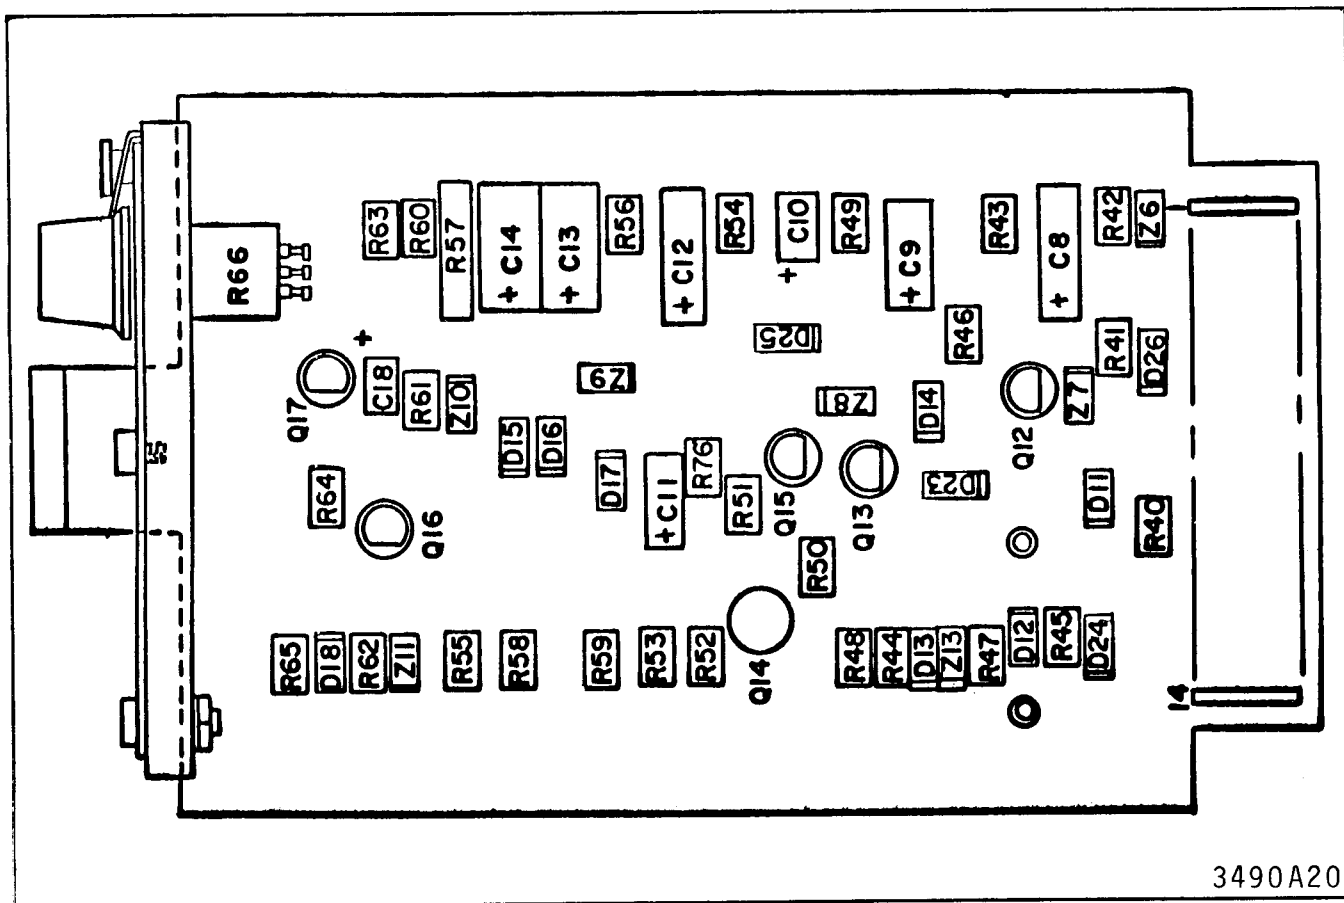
Component Location of Reclose Printed Circuit Board for Type SGRU-52 Relay.
